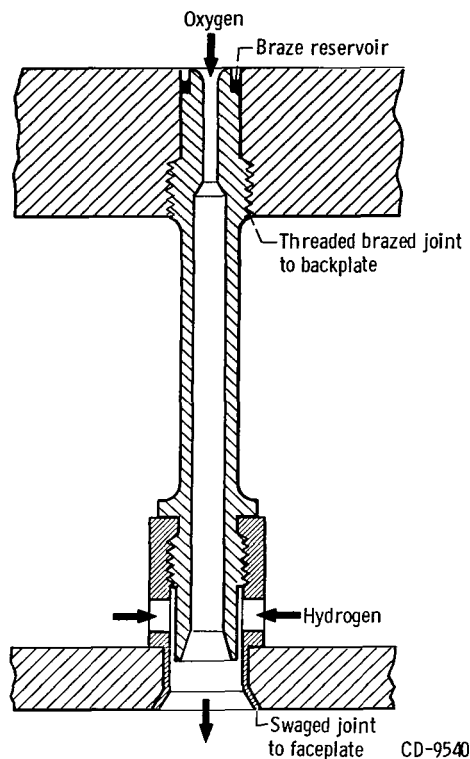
Mechanical attachment of element to backplate and faceplate.
